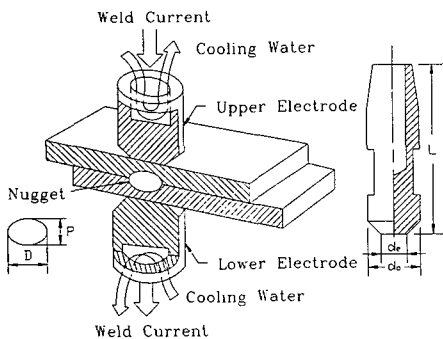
Schematic diagram of spot welding system and electrode geometry
